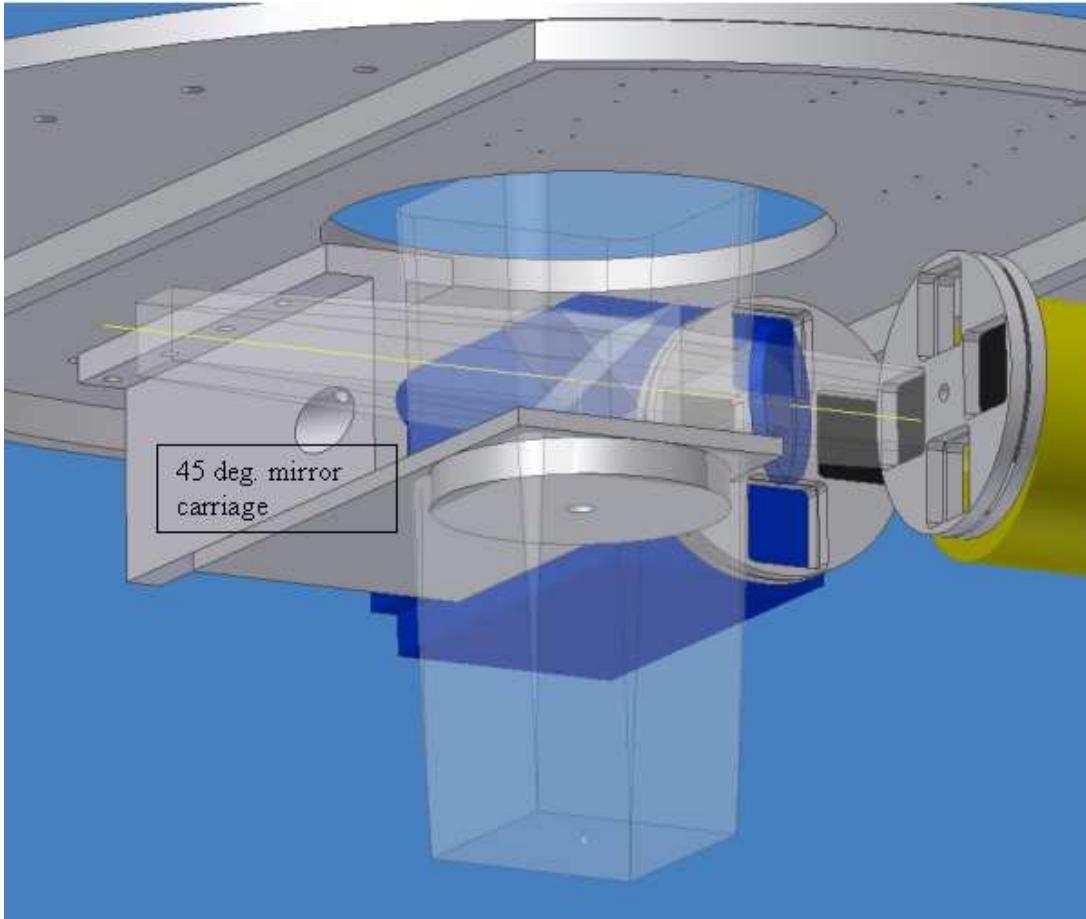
Isometric view of the 45 deg. mirror carriage, FRED science field, and stand by CCD Cameras View against M1 cell, Cassegrain mounting plate removed.
